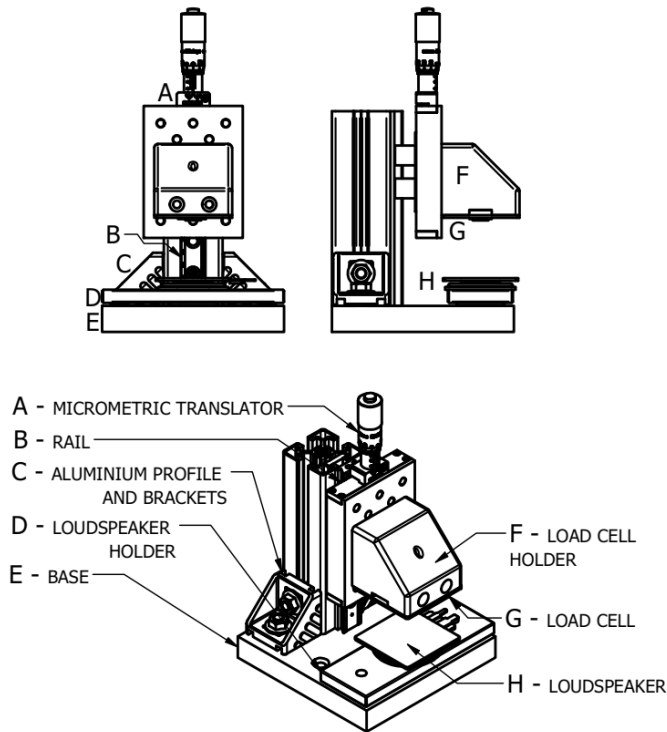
Mechanical CAD design of the assembly of the measuring instrument.
